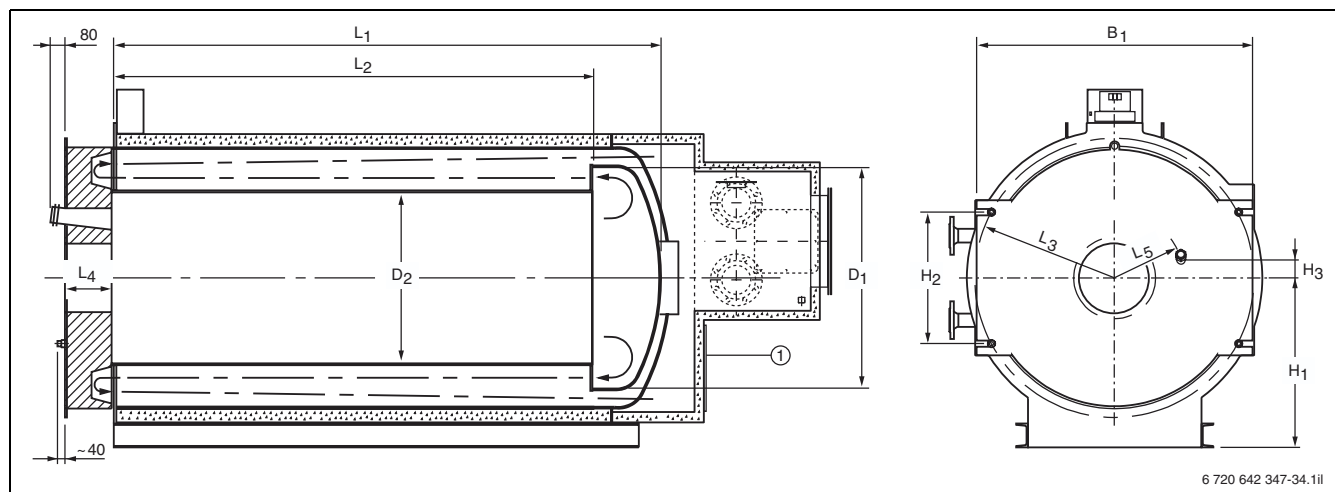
Combustion chamber dimensions Logano plus SB825L LN, boiler sizes 4250 to 17500 (dim. in mm)
